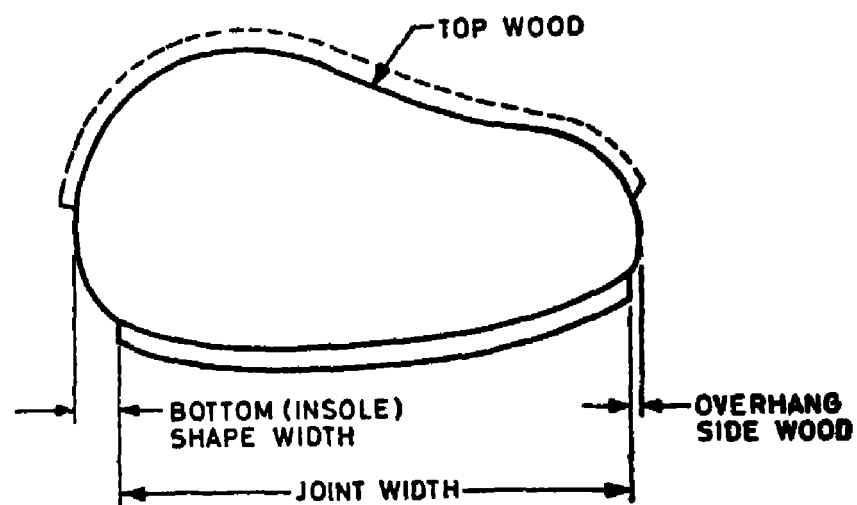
SECTION OF LAST AT JOINT (BALL) POSITION
